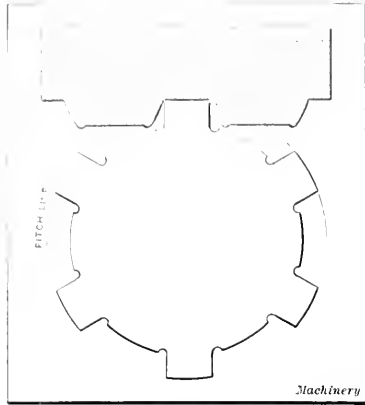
Hob Tooth for generating a Six-spline Shaft
